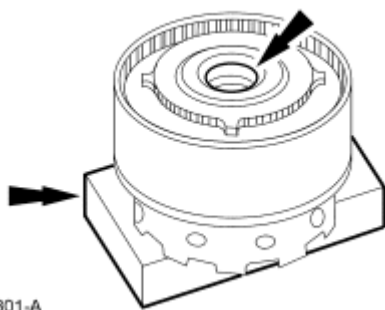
Inspecting One-Way Clutch For Cracks And Damaged Splines
